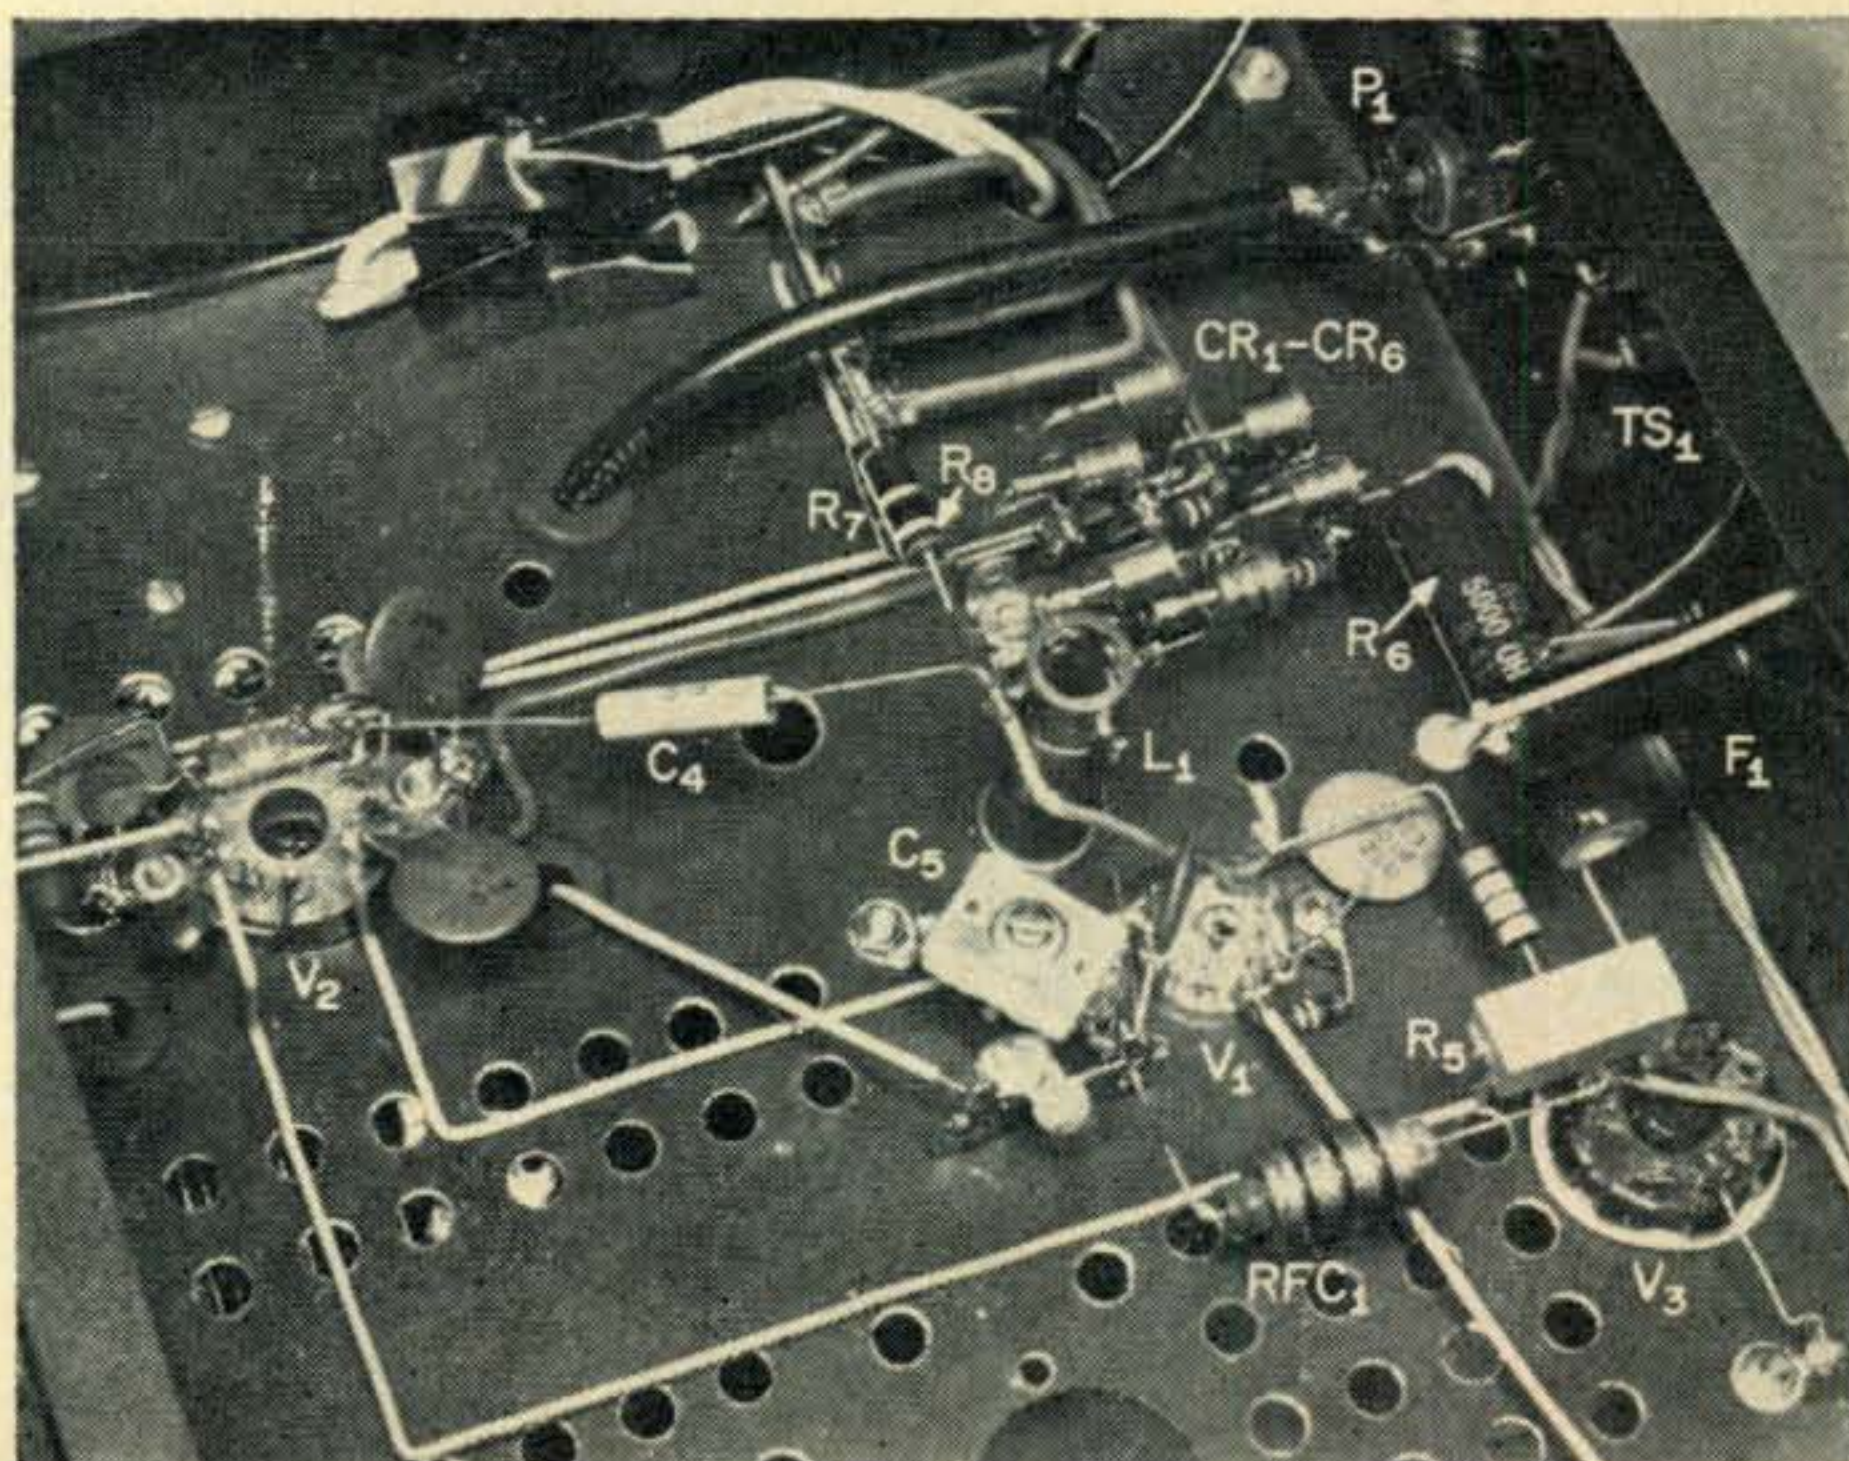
Closeup view of the wiring associated with the tube sockets.
